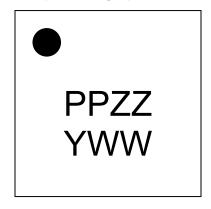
Package Drawing 12-lead $2 \times 2 \times 0.50$ mm
